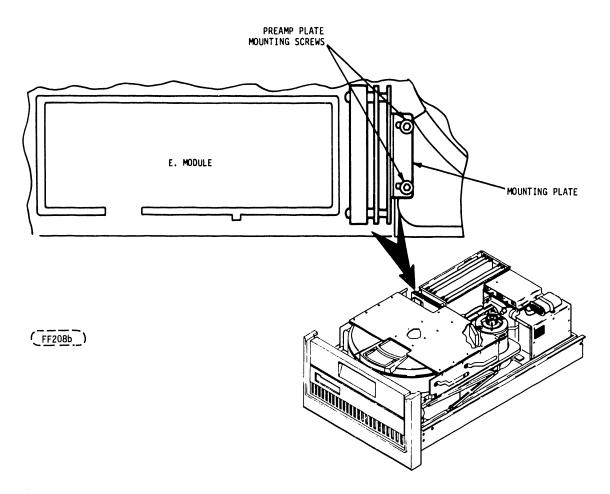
PRE-AMP MOUNTING PLATE, SHOWING LOCATION OF SCREWS TO BE LOOSENED FOR ADJUSTMENT OF MOUNTING PLATE POSITION
